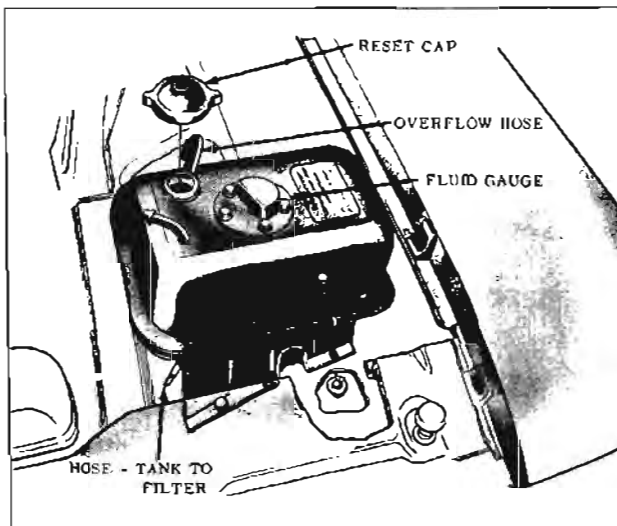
"Turbo-Rocket Fluid" Tank
